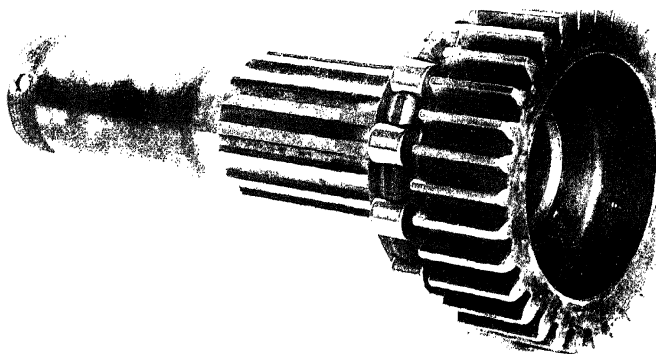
Macrostructure of Bramo Fafnir 323P crankshaft coupling gear.
